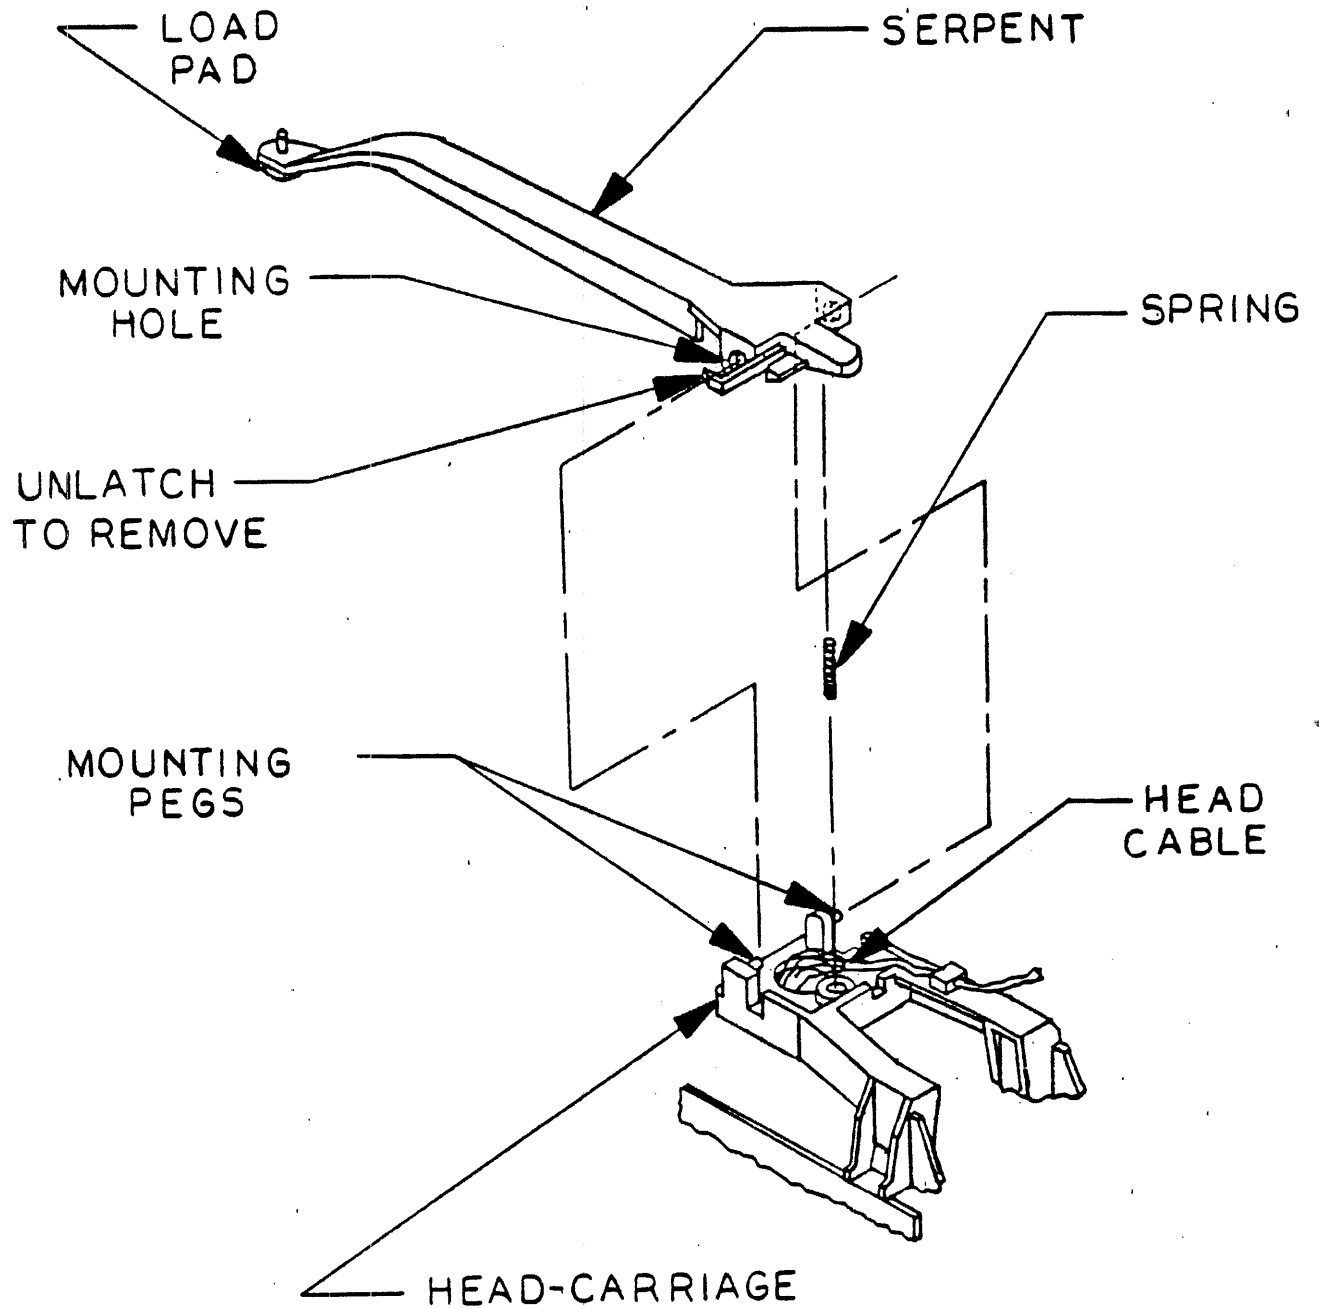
THE REMOVAL OF THE SERPENT FROM THE HEAD CARRIAGE.
